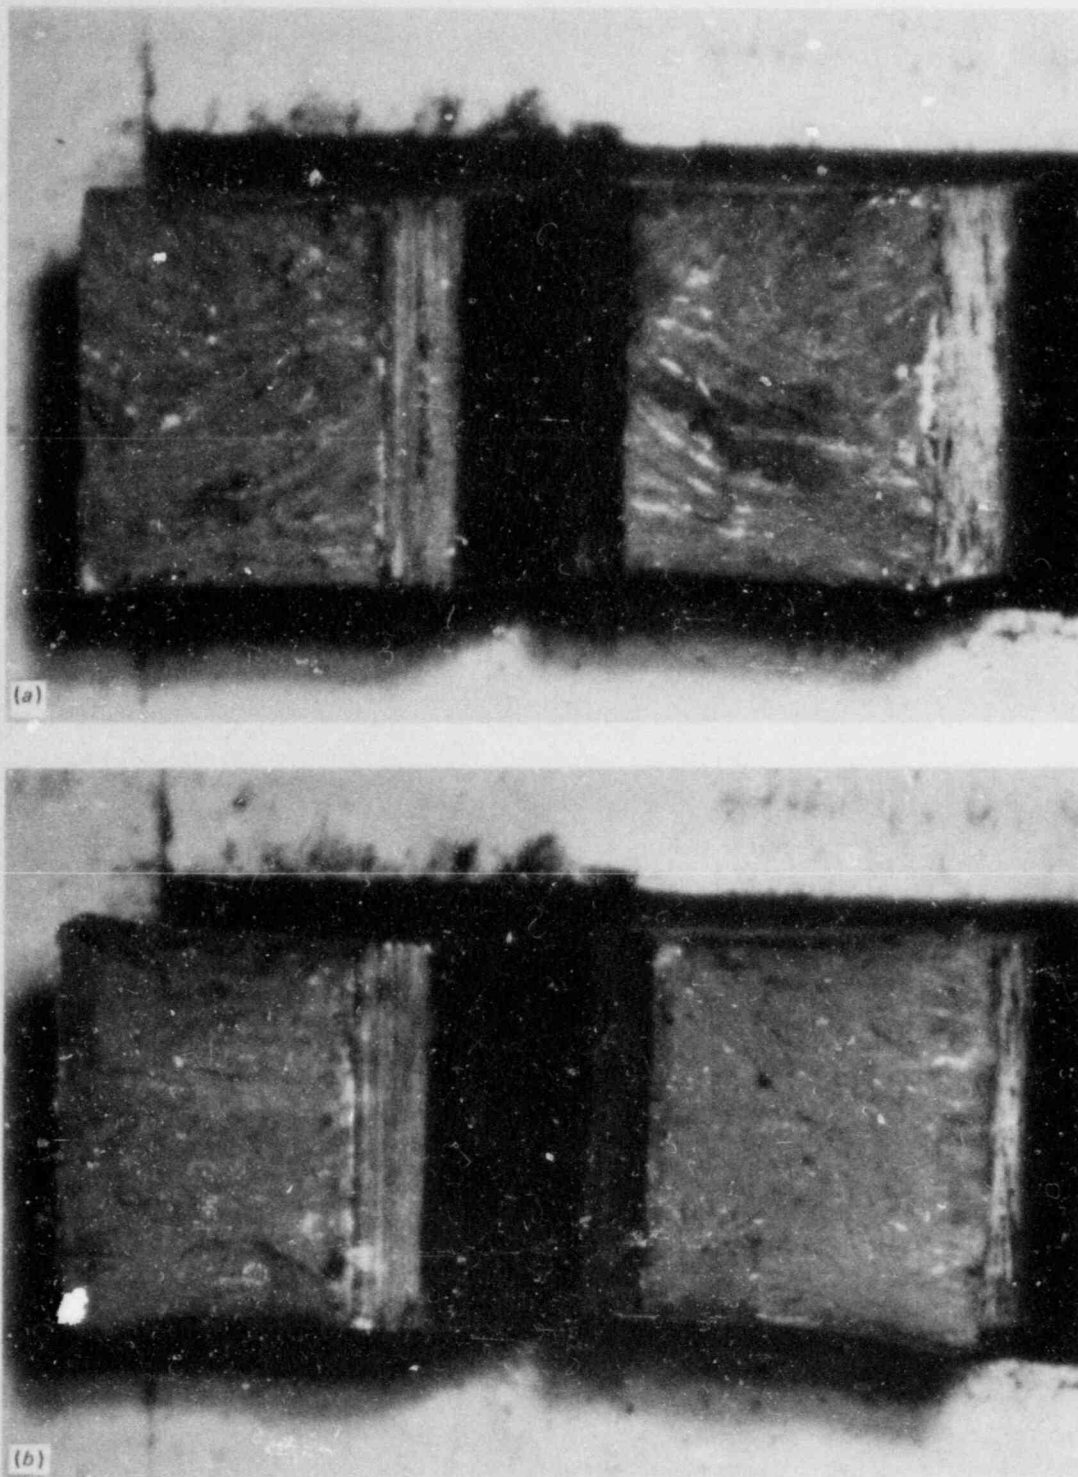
Fracture surfaces of irradiated type 308 stainless steel cladding Charpy impact specimens. (a) Specimen CPC-304 tested at  $-60^{\circ}\text{C}$  in very low-transition range and (b) specimen CPC-290 tested at  $150^{\circ}\text{C}$  on upper shelf.
